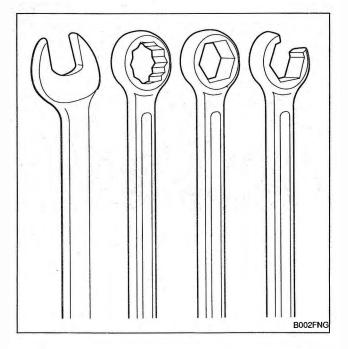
Types of wrench heads. From left, open-end, 12point box-end, 6-point box-end, flare nut.
